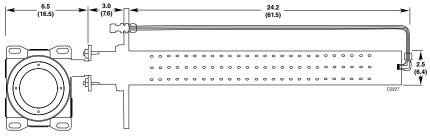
Dimensions of PIRDUCT Detector in Inches (cm)
